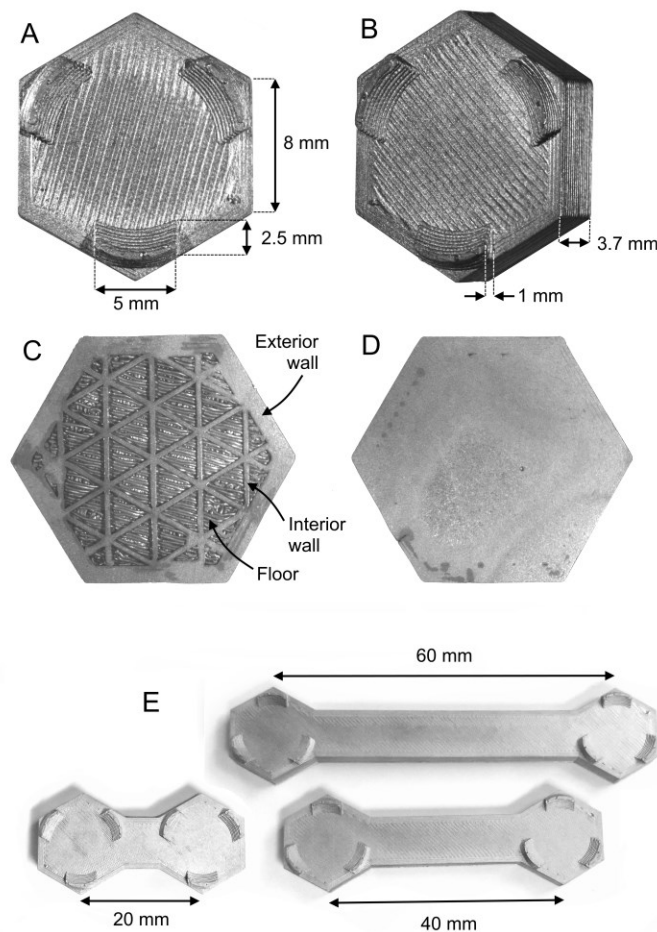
Hexagonal test AM parts showing a,b) general dimensions, c) a cross-section of the lattice infill, d) a cross-section of the solid infill, and e) dual joint lattice infill parts used for joint proximity testing
